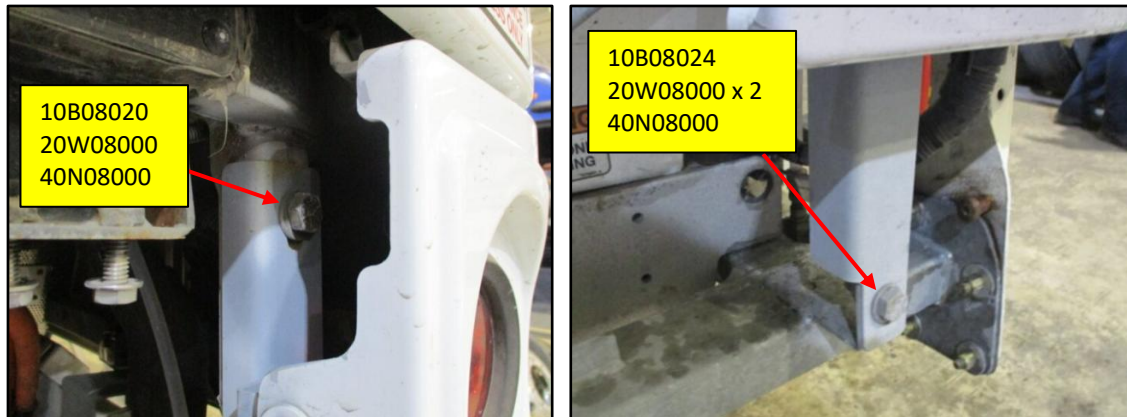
& 91b: Upper and Lower Corner Pillar Mounting Bracket Location Reference
